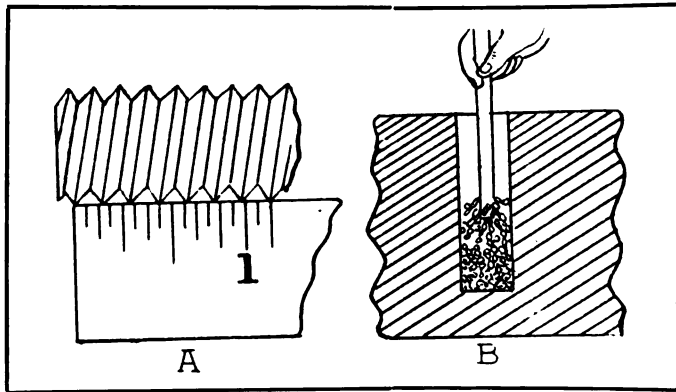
A, Handy Method of Determining Thread Pitch with a Rule; B, Removing Metal Chips with a Magnetized Rod.
